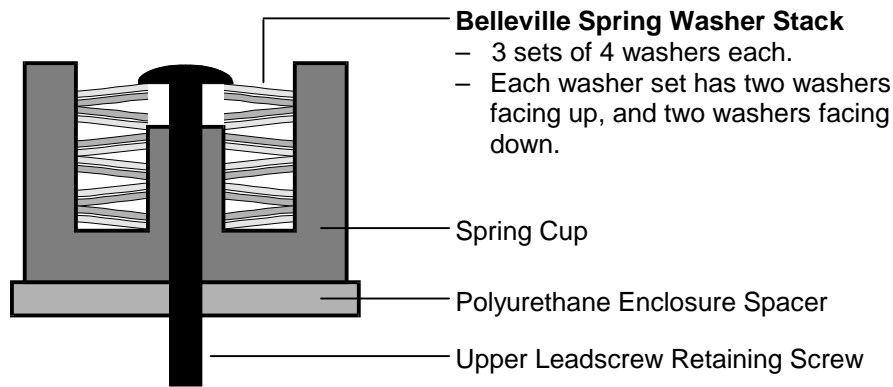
The Spring Cup Assembly and Enclosure Spacer
